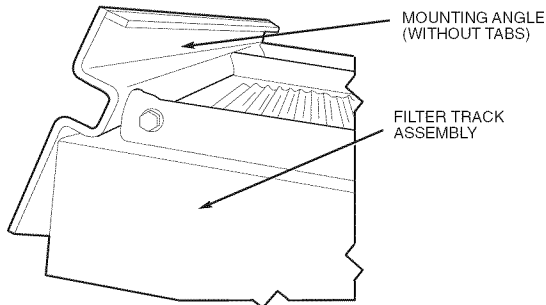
Mounting Angle (Without Tabs) Attached to Filter Track Assembly
